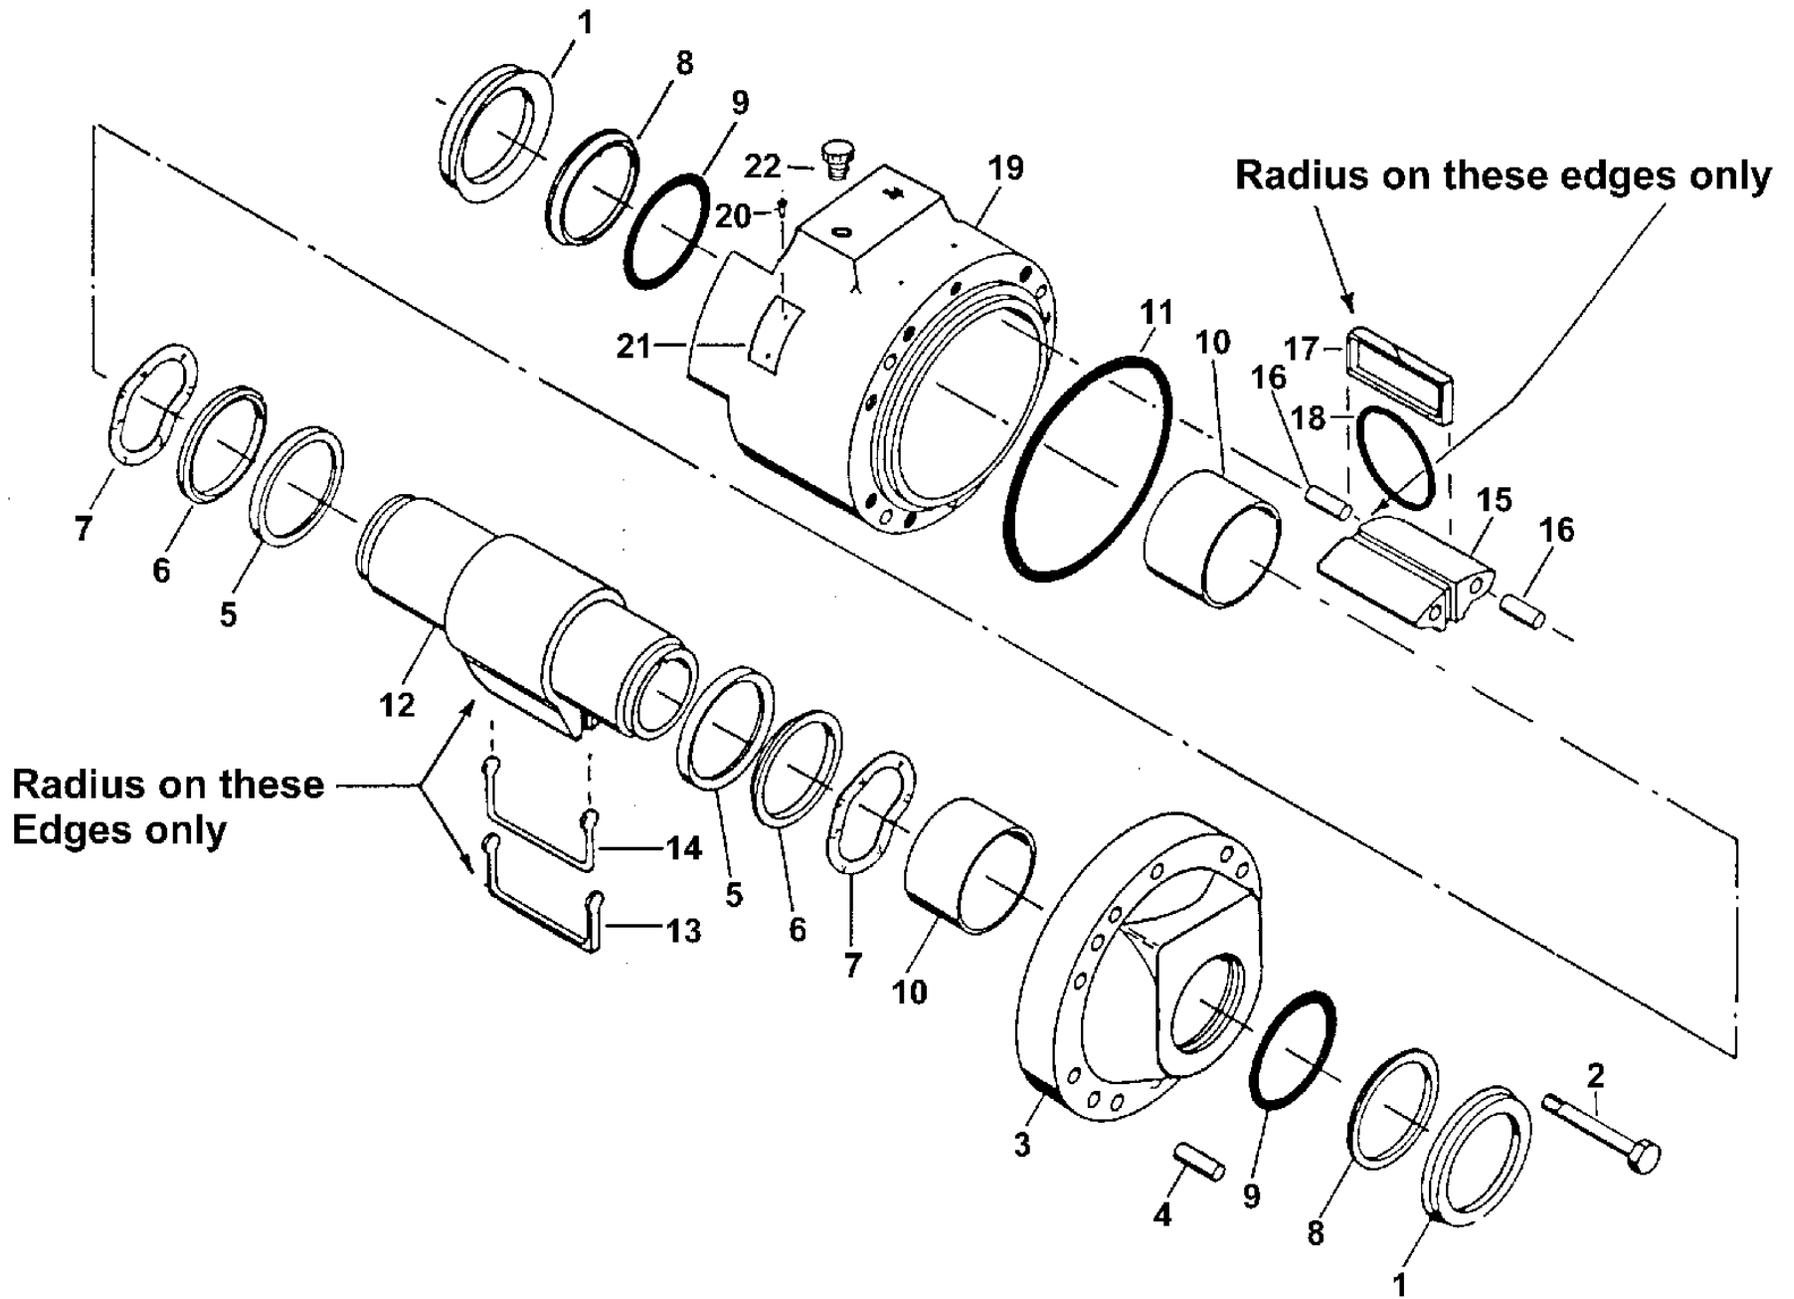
HS Series Rotary Actuator Assembly exploded view. See page 8 for reference.
